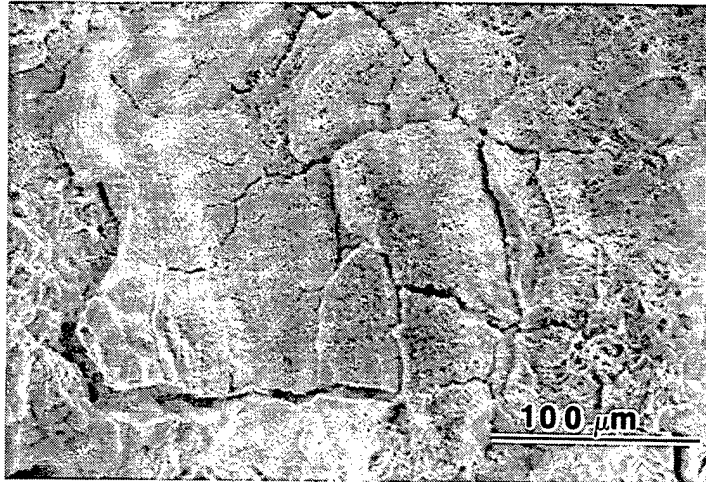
SEM of transgranular cracking on the surface of the fracture with secondary cracking.
